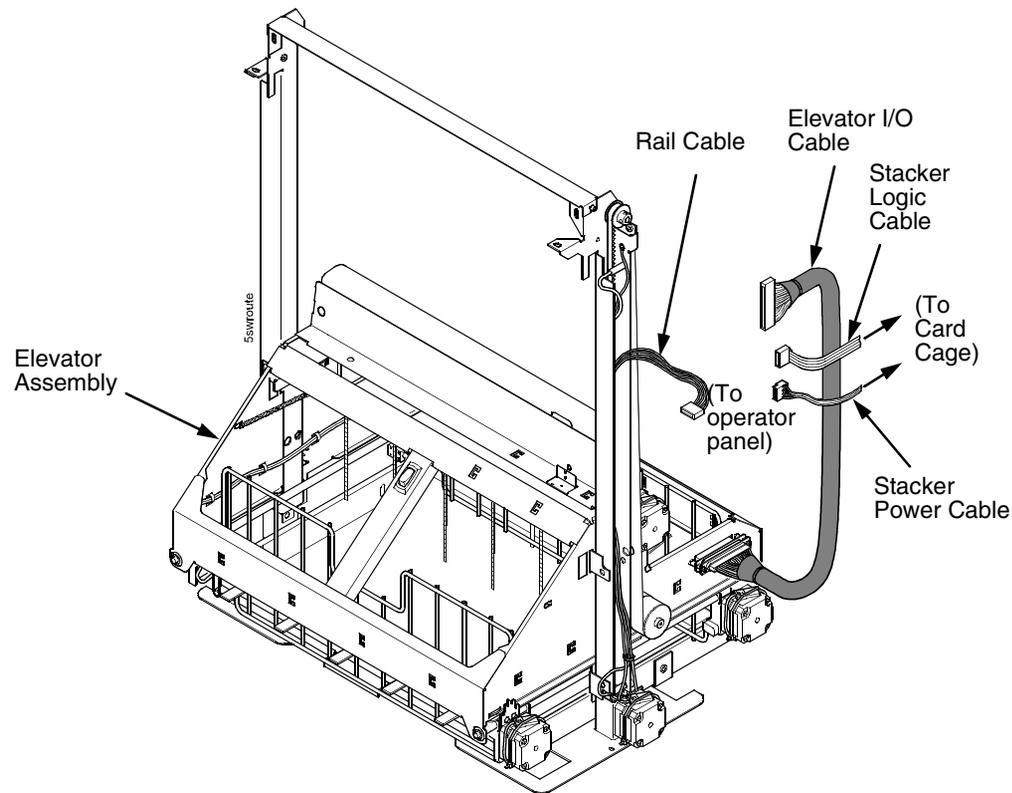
This figure shows where to connect the stacker I/O cable to the stacker elevator.
